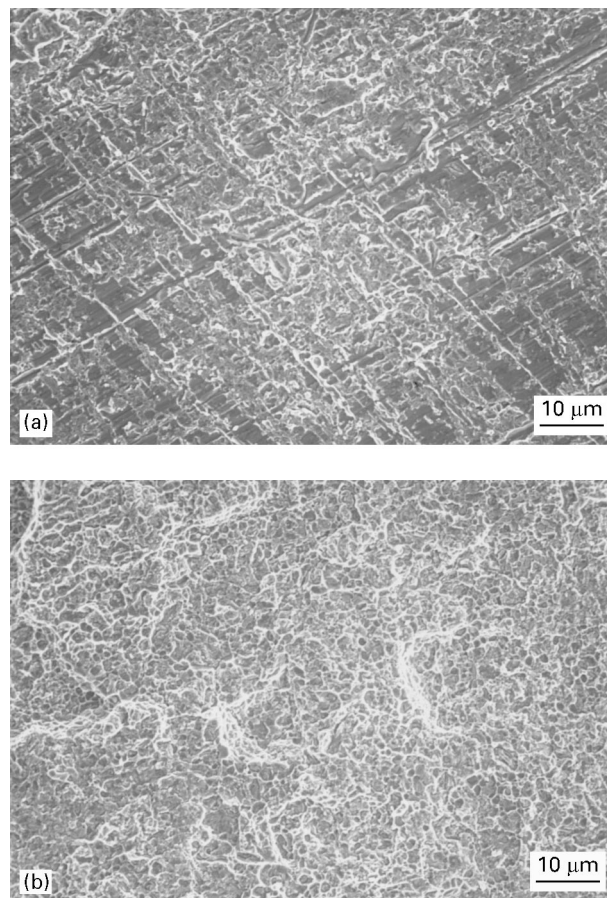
Scanning electron micrographs of the failure surface of welded joints after the dynamic tensile loading test. Welding temperature: (a) 500 °C and (b) 575 °C. ($P = 2$ MPa, $t = 2$ h.)
